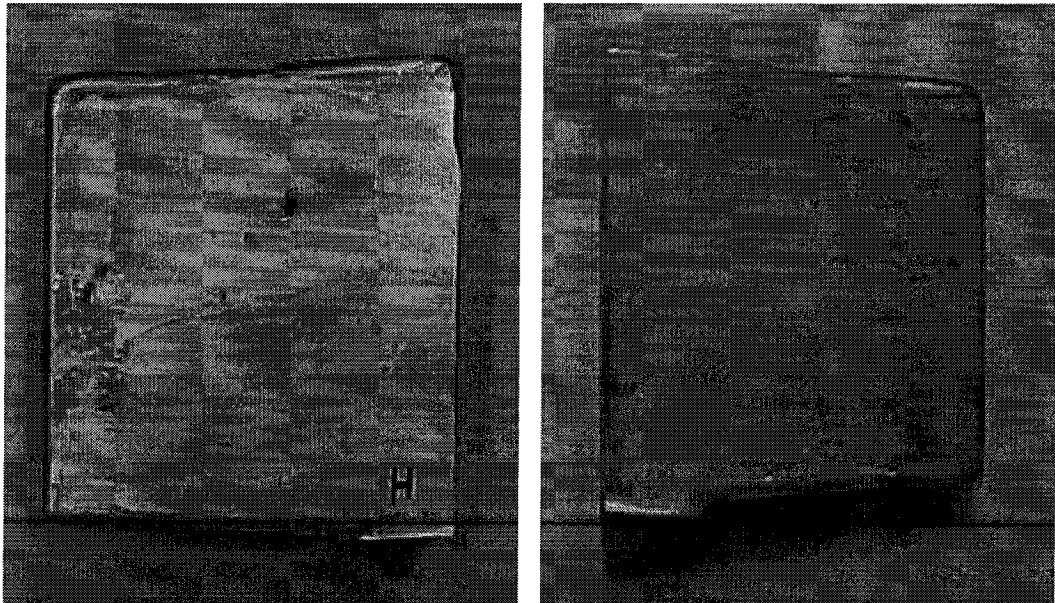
Magnesium casting produced with heat pipe cooling (H2)
